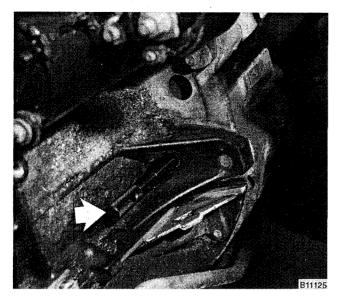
BMW special tool no. 11 2 300 installed through bellhousin and into flywheel (arrow) to lock crankshaft at TDC.
